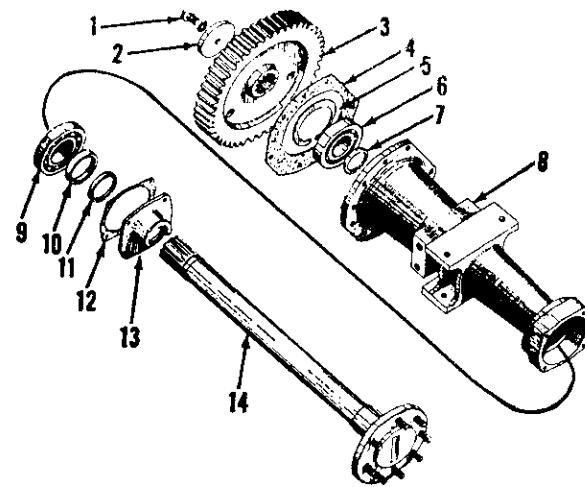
Exploded view of axle, axle carrier and component parts used on Series B-275, B-414, 354, 364 and 384.
